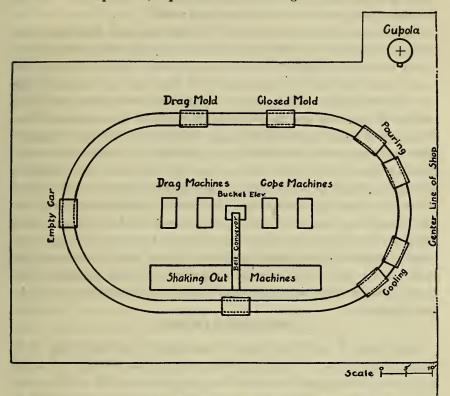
Floor plan of a bathtub foundry operating on a track system
